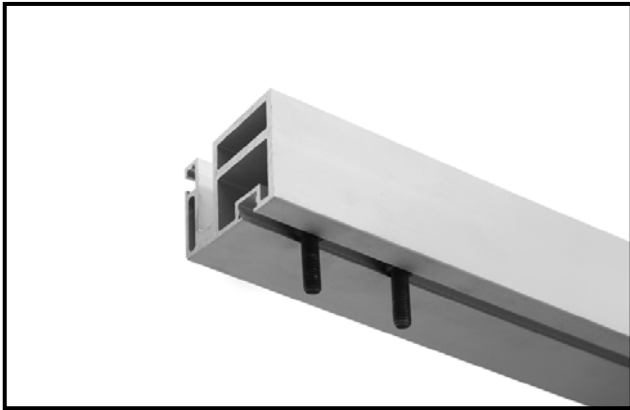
Inserting the hex bolts to the bottom slot of the fence rail
